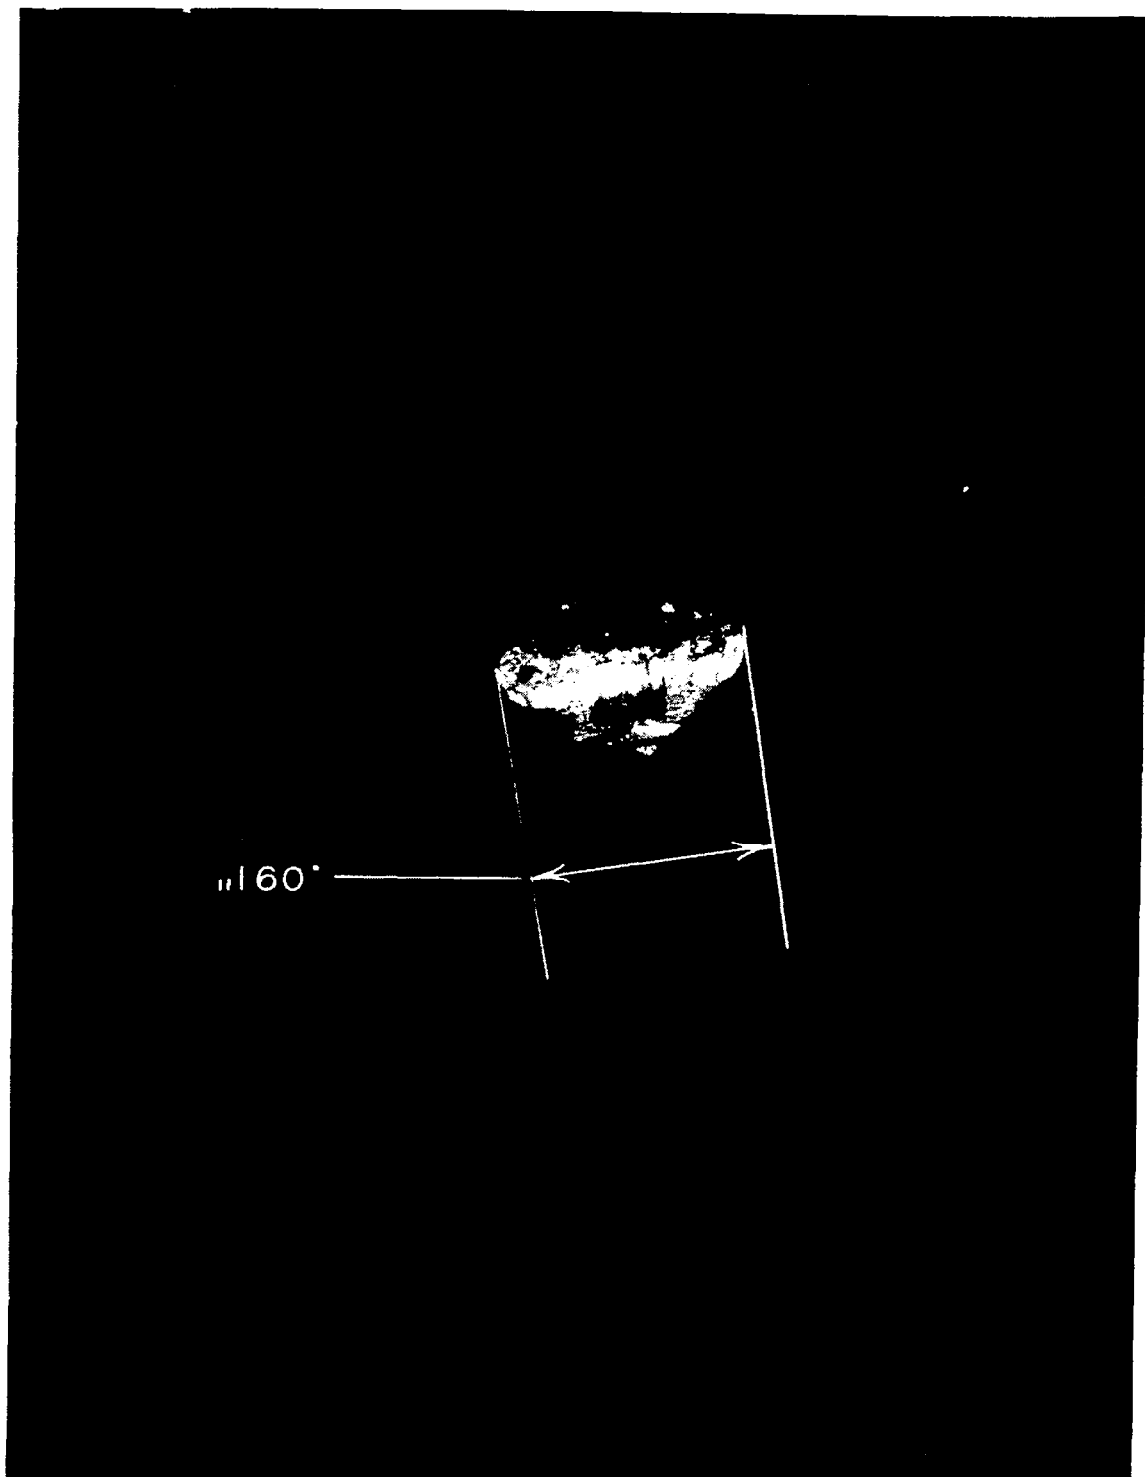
Deformed Rivet Head of Drilled Copper Blade Locking Pin after 125-Pound Load
